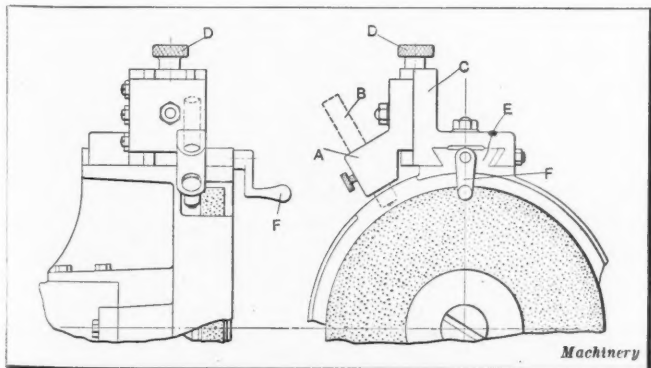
Wheel Truing Device used on Wilmarth & Morman Surface Grinding Machines
